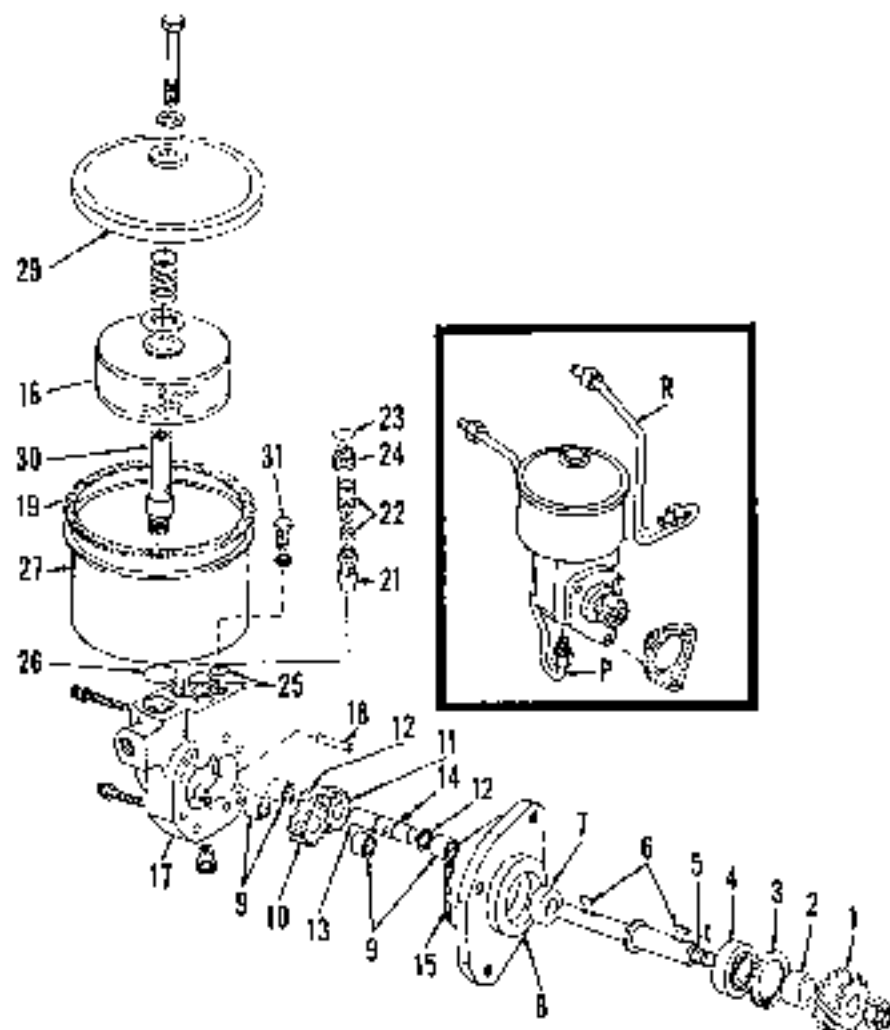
Exploded view of power steering pump used on Models MF230, MF235 and MF245 equipped with gasoline engine. Inset shows location of pressure line (P) and return line (R).
